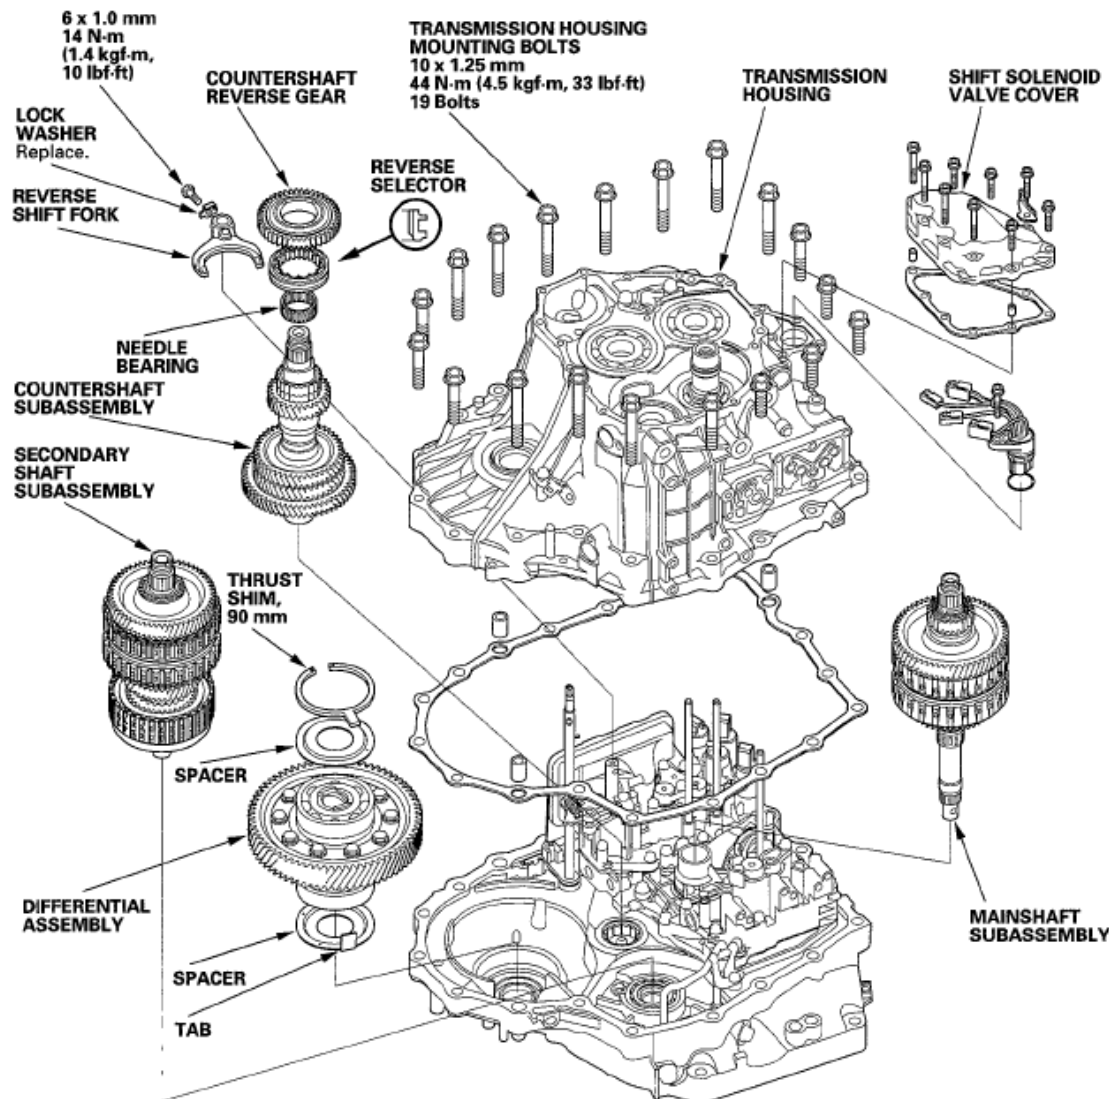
Exploded View Of Shaft Assembly, Housing & Bolt Torque
